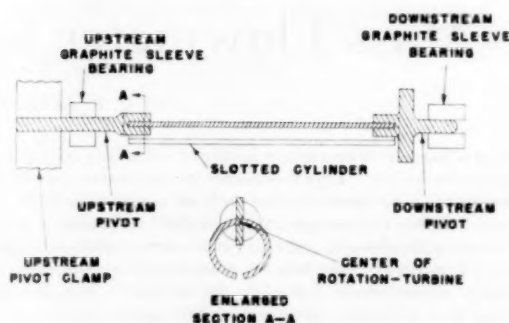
TURBINE BEARINGS AND SUSPENSION SPRING
